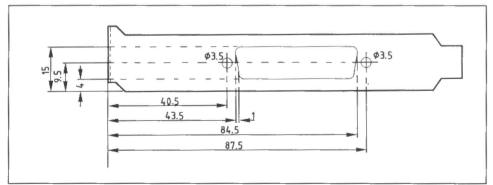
Cutting and drilling details of the support bracket at the rear side of the PC card.
